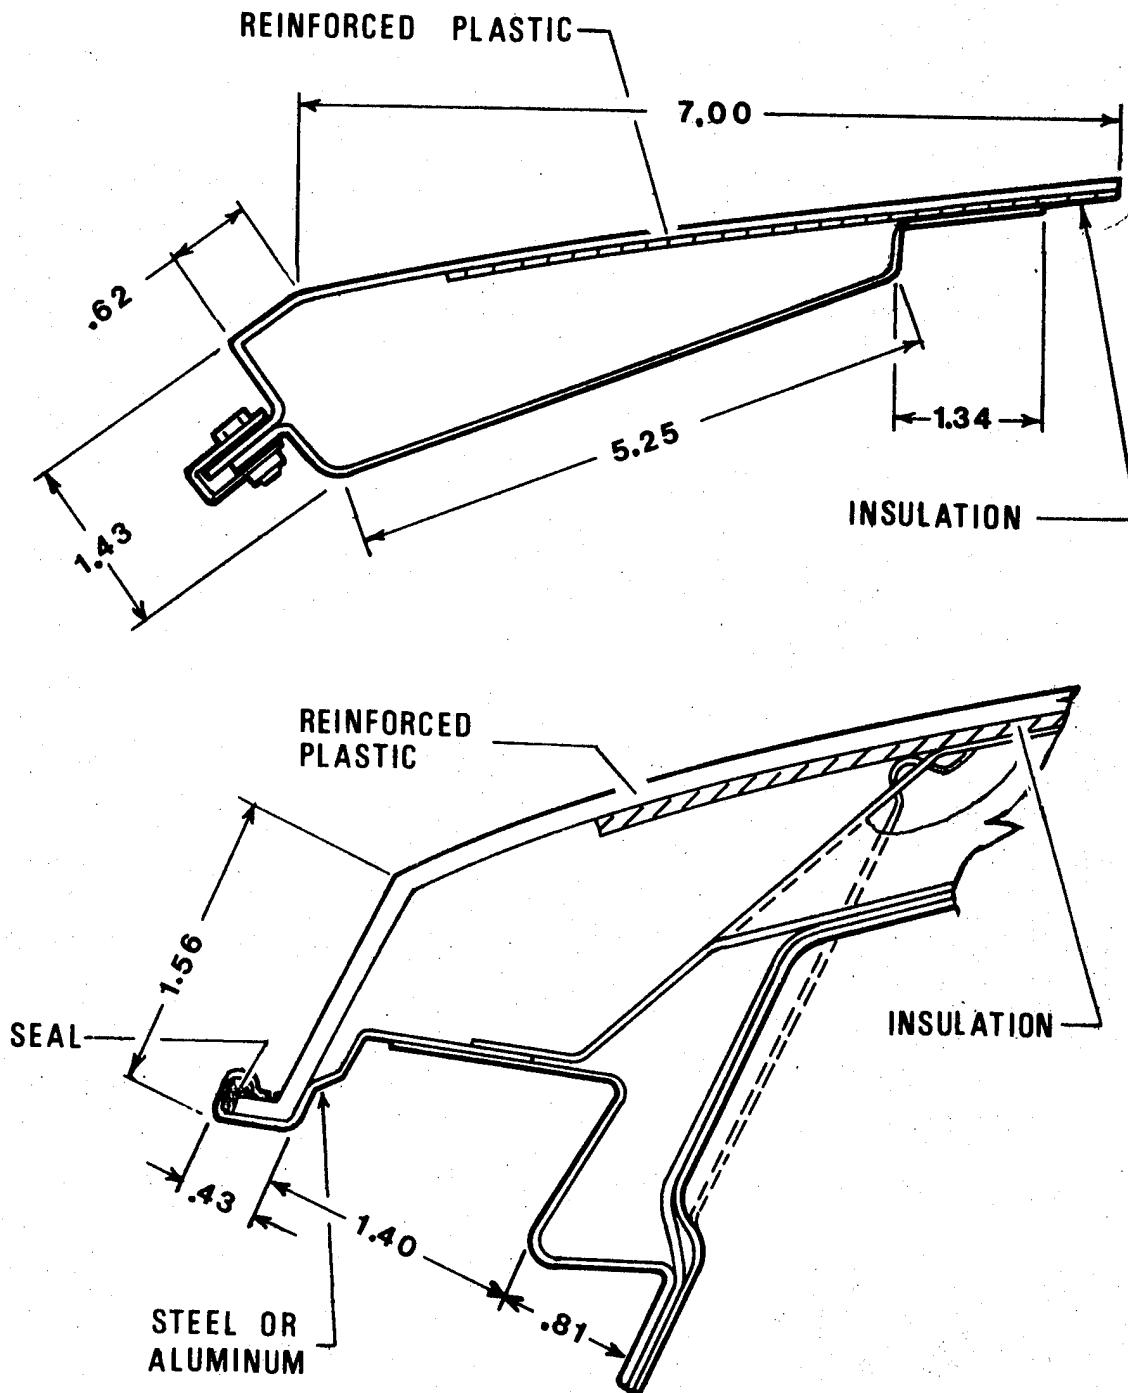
GLASS POLYESTER ROOF STRUCTURE CONCEPT
